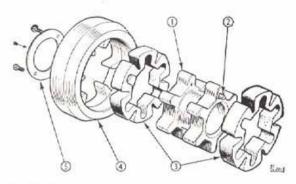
Exploded view of fuel-injection pump flywheel assembly.
